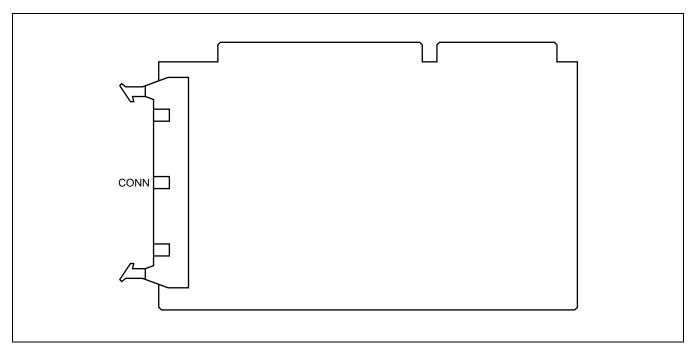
Face Layout of PZ-M565 (ISAGT) Card
